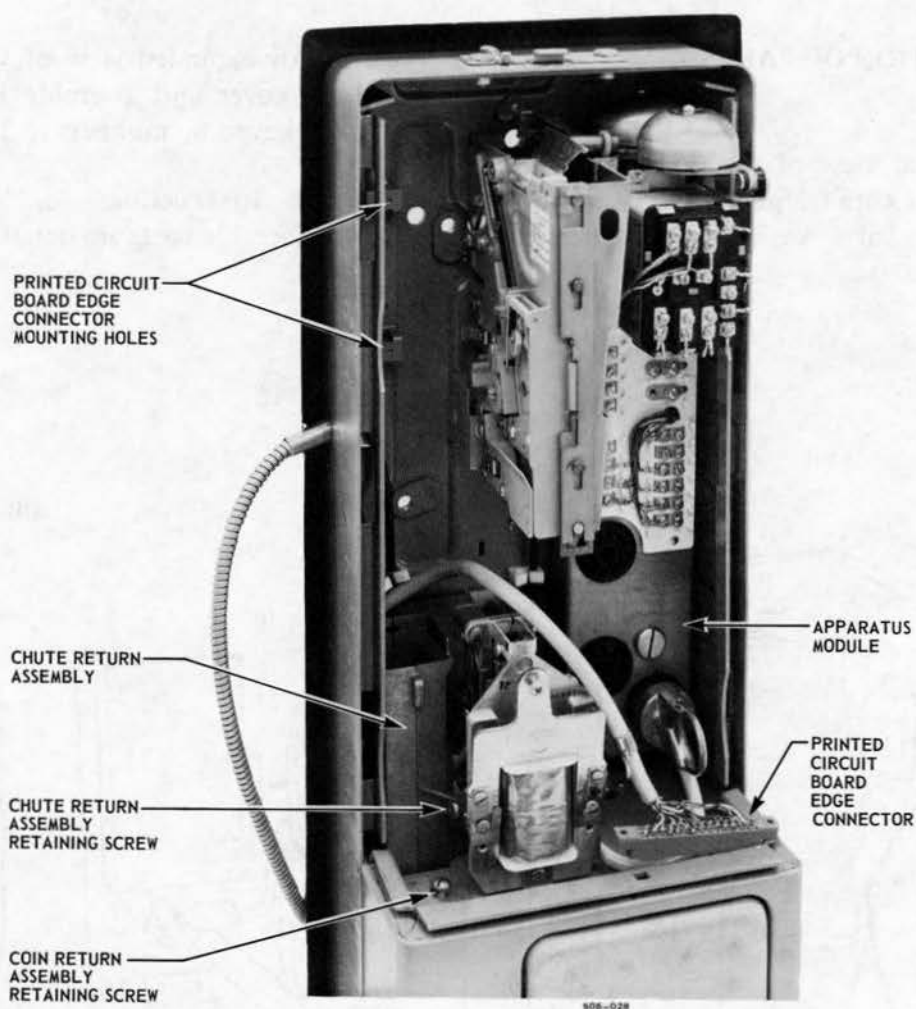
Mounting Arrangement for Coin Return Chute Assembly
